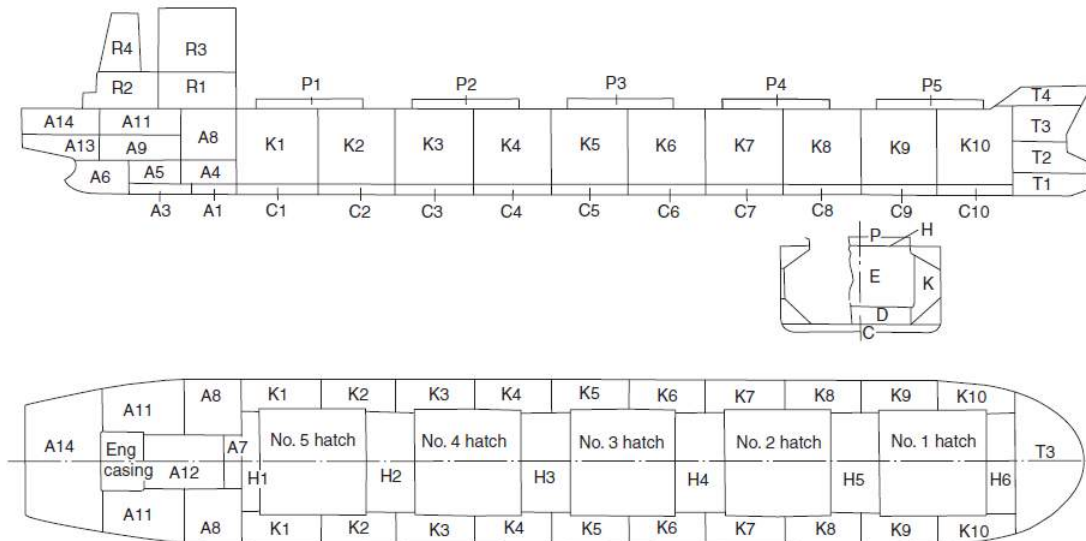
Typical block erection for a single-hull bulk carrier.
